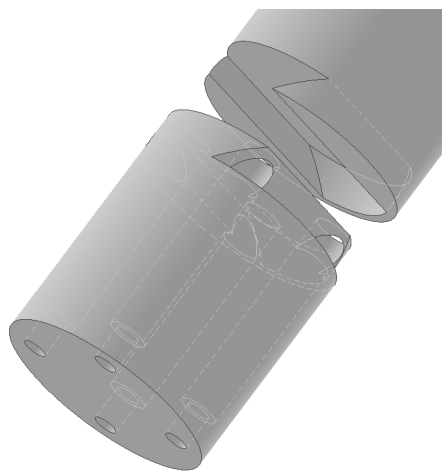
60mm and step cylinder split detail, hiding fastening bolts
